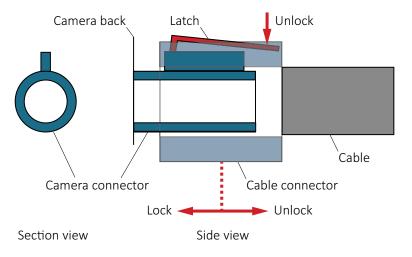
FAKRA coaxial cable-side connector: Locking mechanism
